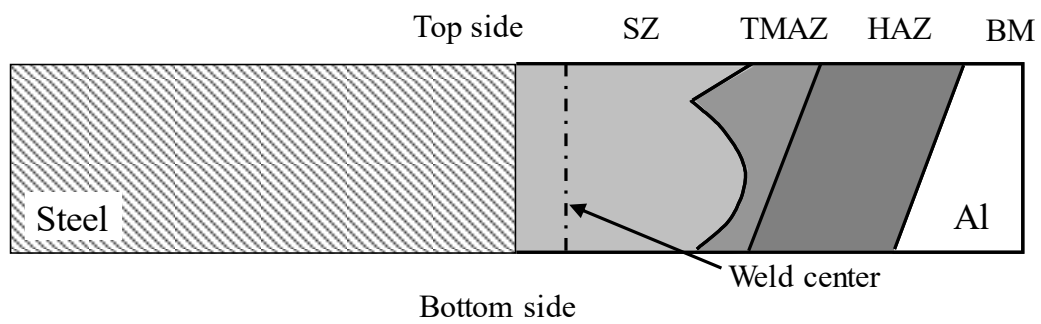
Schematic illustration of weld structure of dissimilar joint between Al and Steel.
